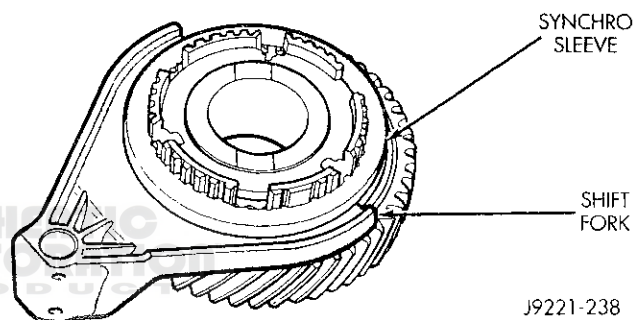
Installing Fifth Gear Shift Fork In Synchro Sleeve
